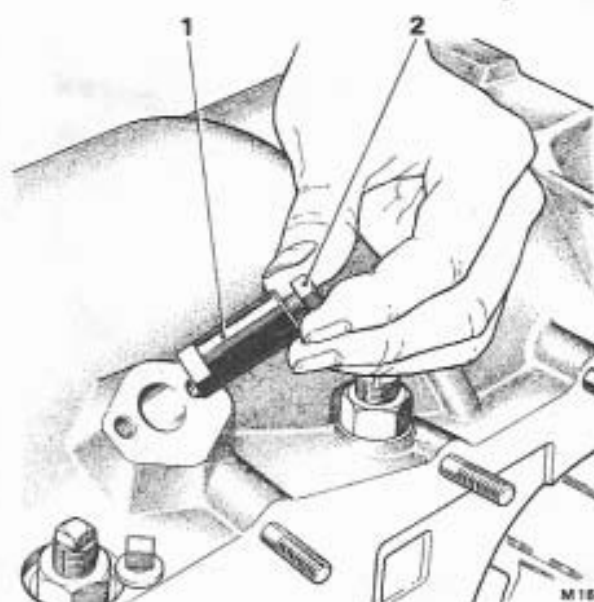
REMOVING THE CENTRE CLUTCH KEY
